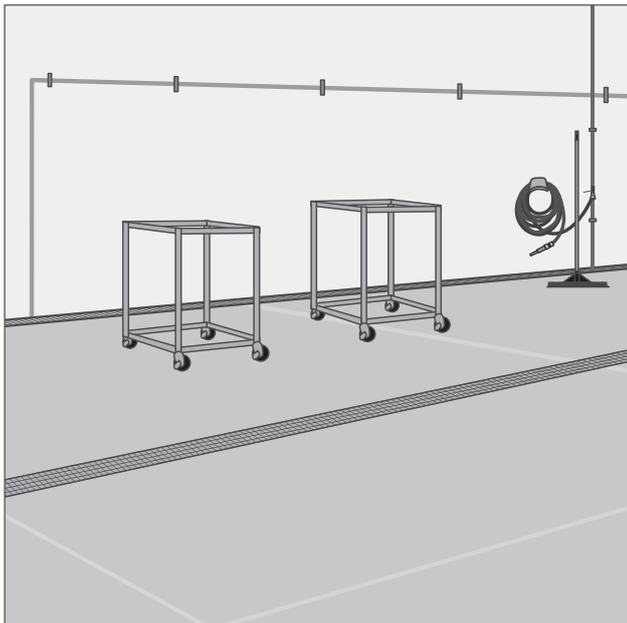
Effective workplace design in a workshop to capture water run-off, with in-built drains and floor bunding.
